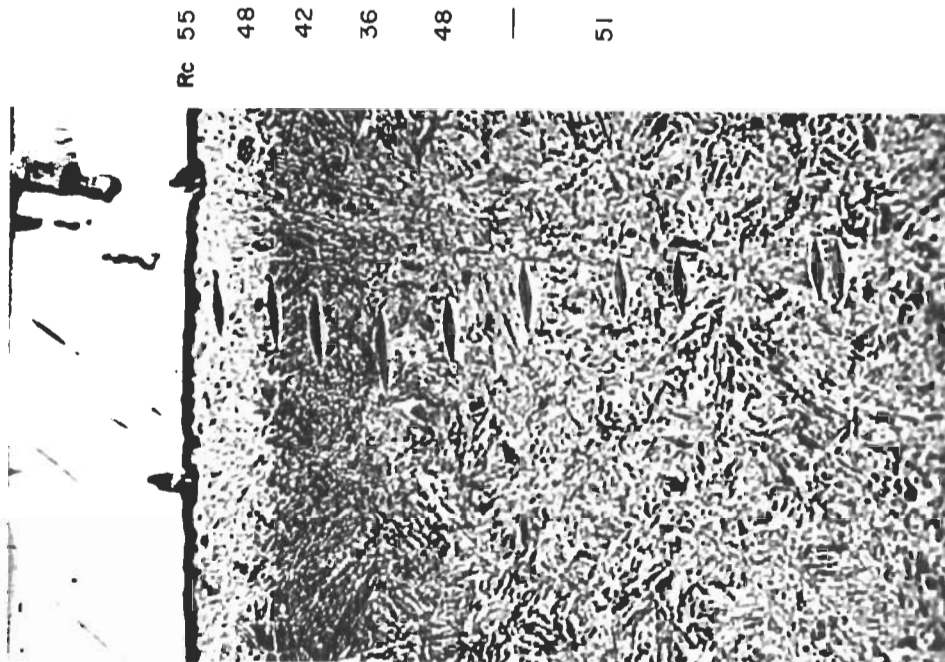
Surface Grinding Burns - Axle Beam Failure 7/61
